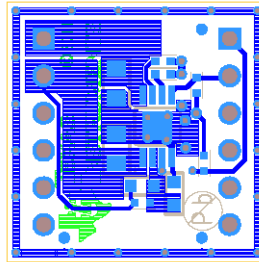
SMP-TPS7A1601-MVK Board Layer 1 – Top Side
